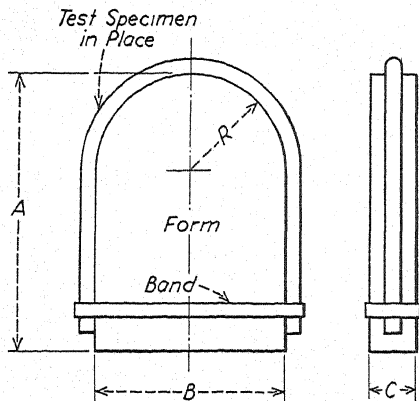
Test Specimen on Form for Aging Test (see Table I).
